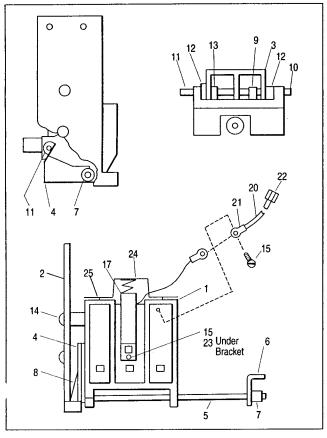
Blown Fuse Trip Assembly 18-399-805-501
